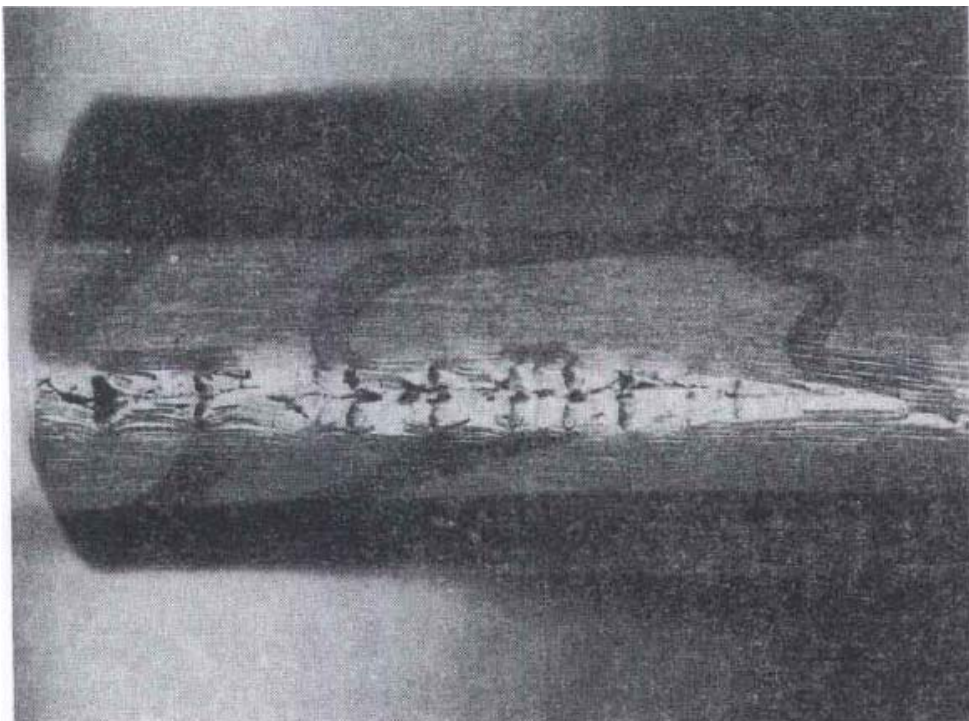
Sub-Arc Welded – 7 ga.
